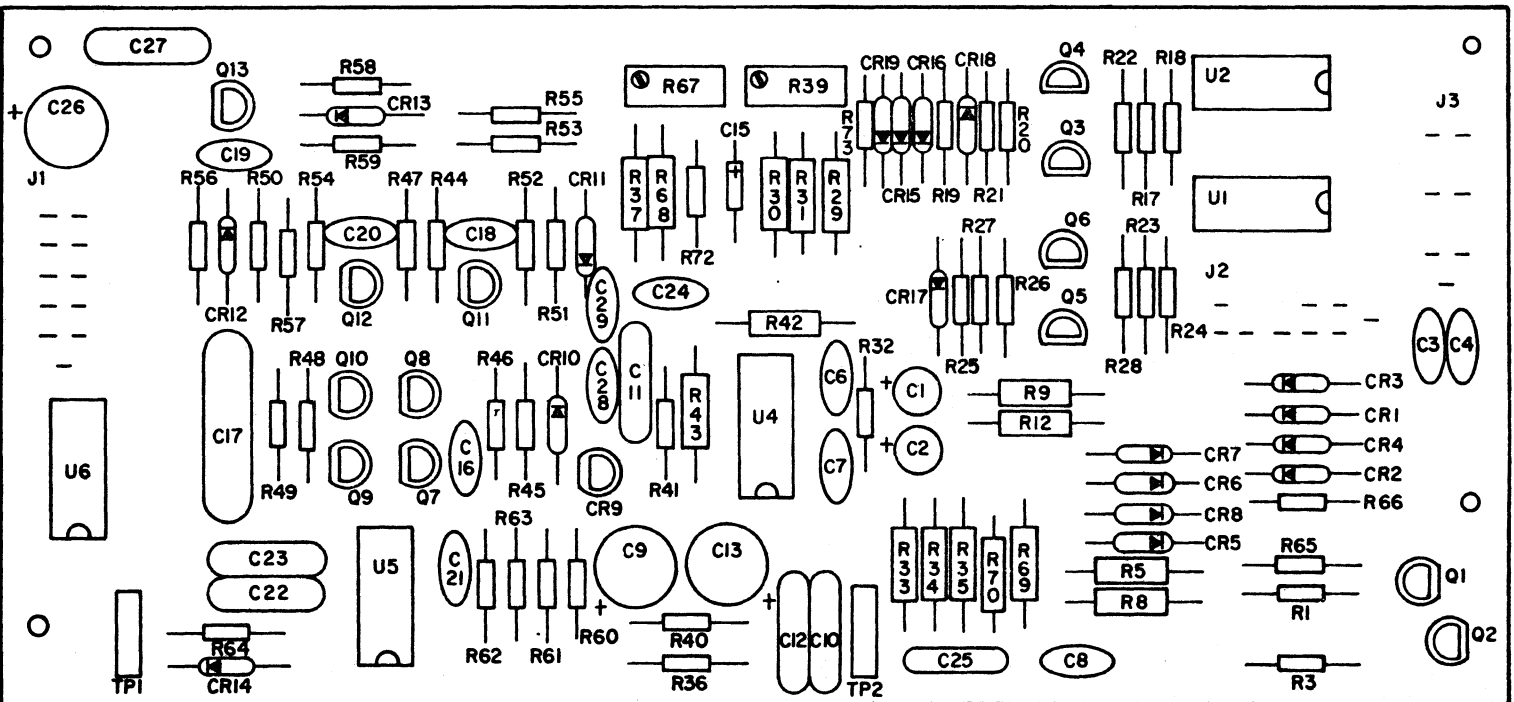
5 IPS READ/WRITE ASSEMBLY
